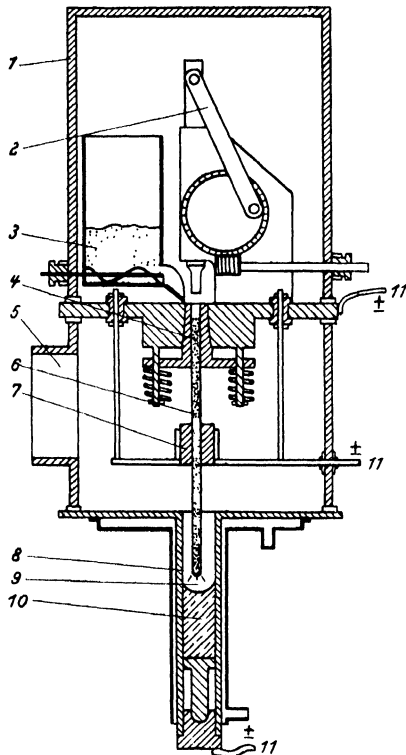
Furnace for melting and casting molybdenum using consumable electrodes (after R. M. PARKE and J. L. HAM¹³)
